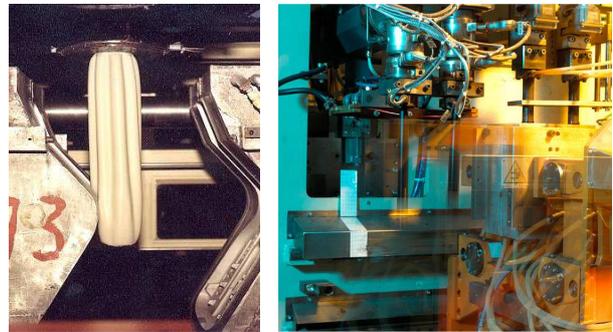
On the left, a plastic parison falling between the mold's two parts, and on the right, the REINER blowing machine for tubes used as outer covers of car dampers [17].
